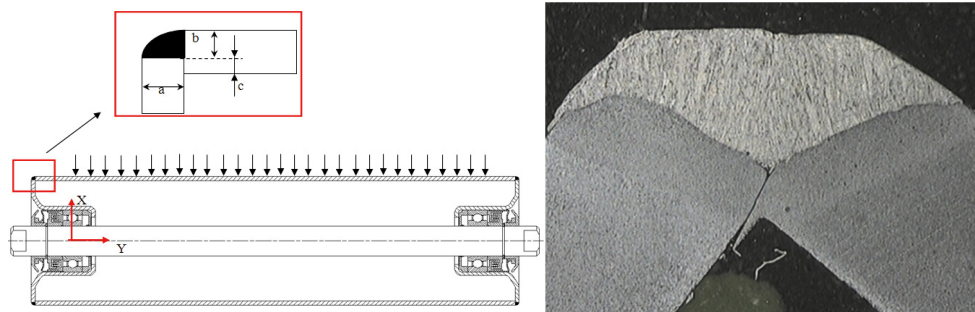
Scheme showing the main geometrical parameters at the weld root and an example of lack of penetration
